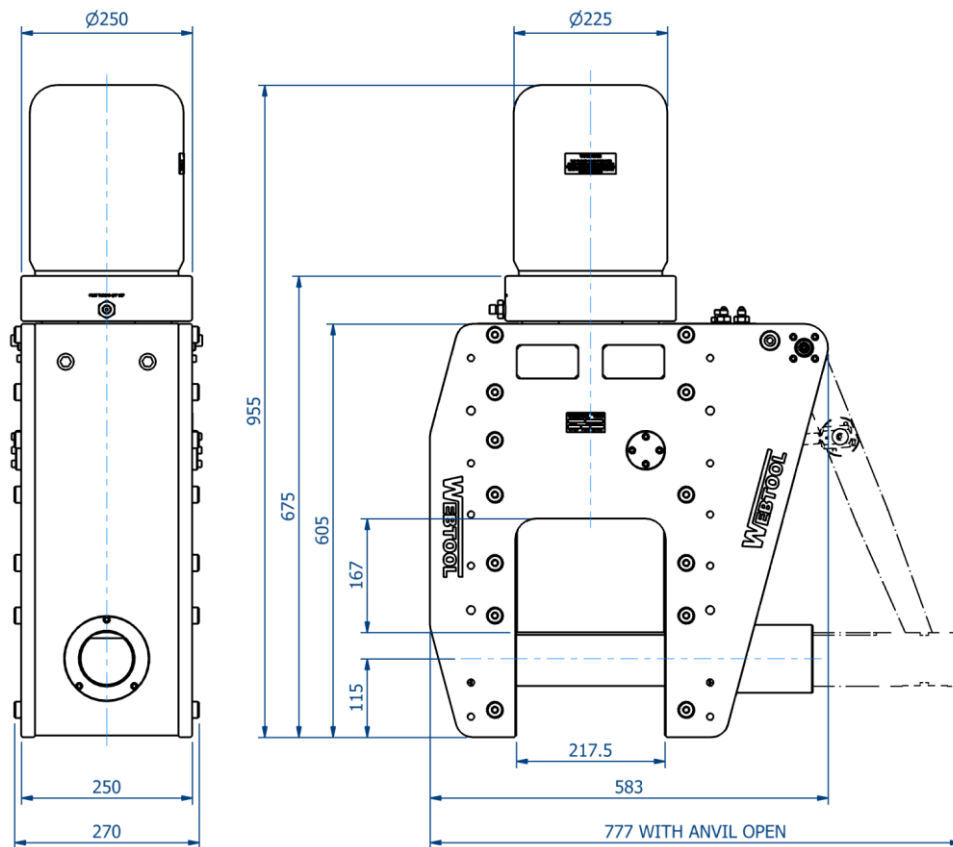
Overall dimensions of cutter only (pipework and lifting frame excluded)
